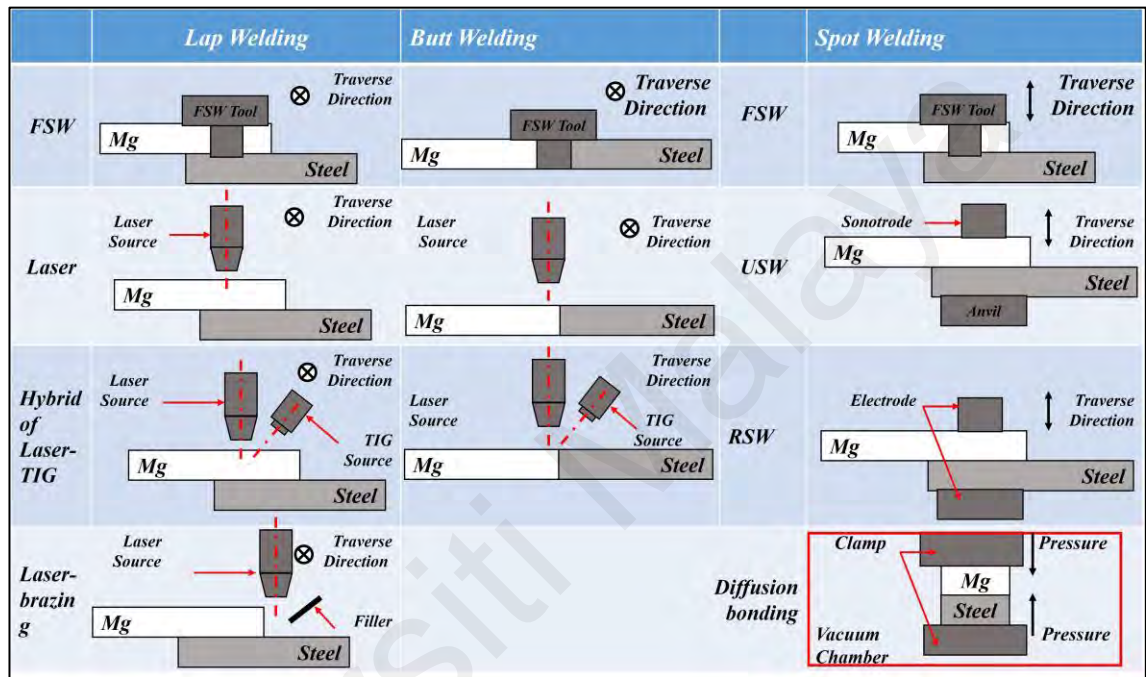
Schematic of joining techniques used to join Mg and steel
